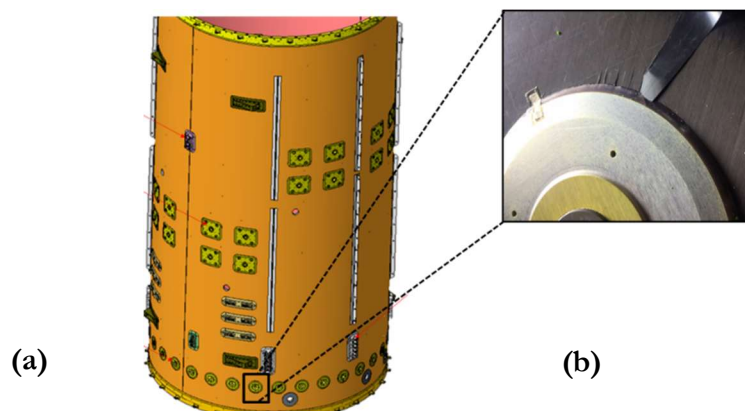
(a) Schematic of Spacecraft Thrust Tube with Bonded Fittings; (b) Thrust Tube
